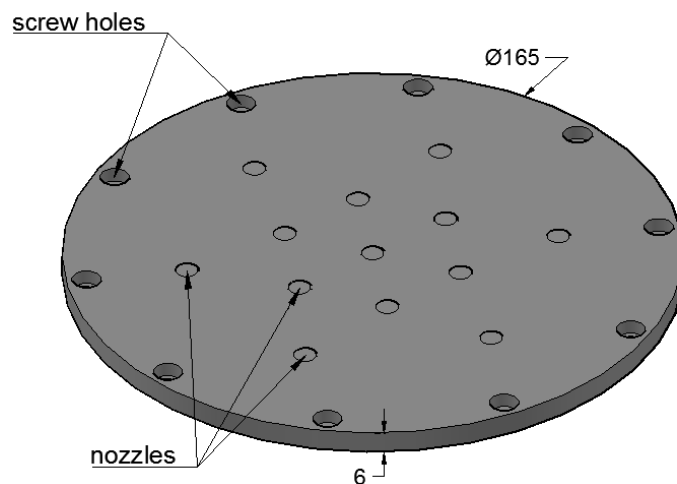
Air-bearing seal with nozzles (dimensions in mm)
